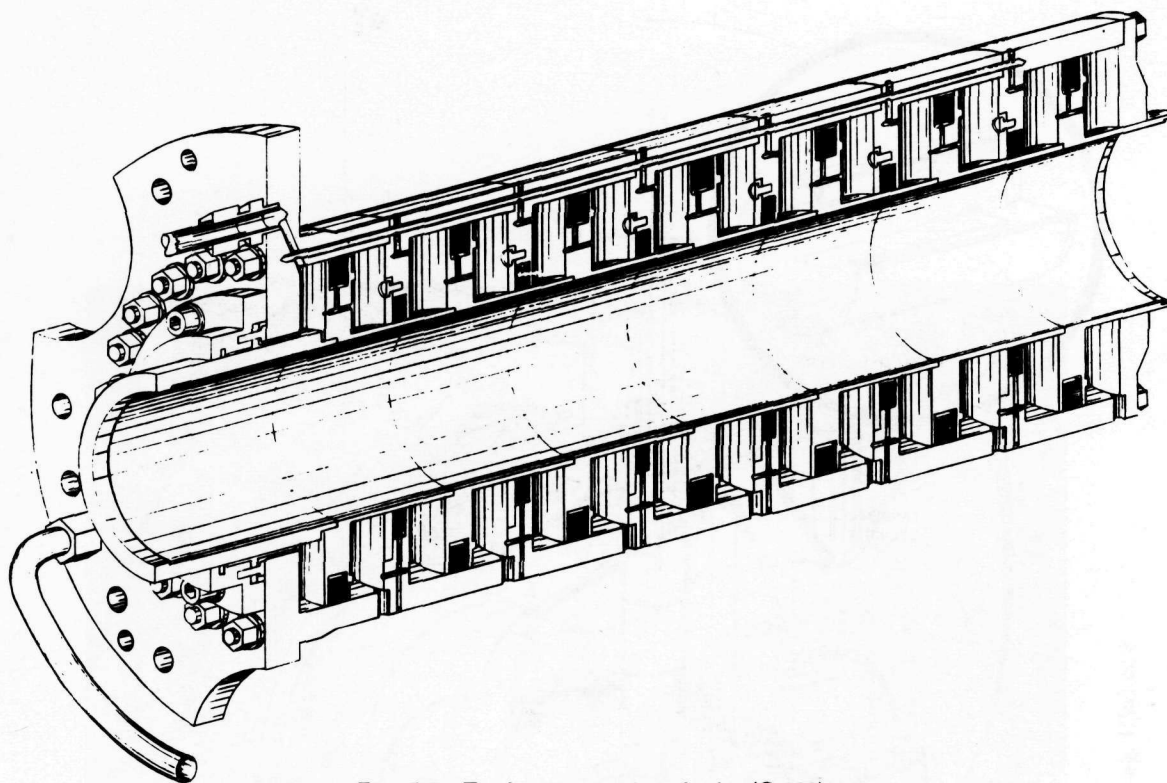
Tandem pneumatic cylinder (G-989)
